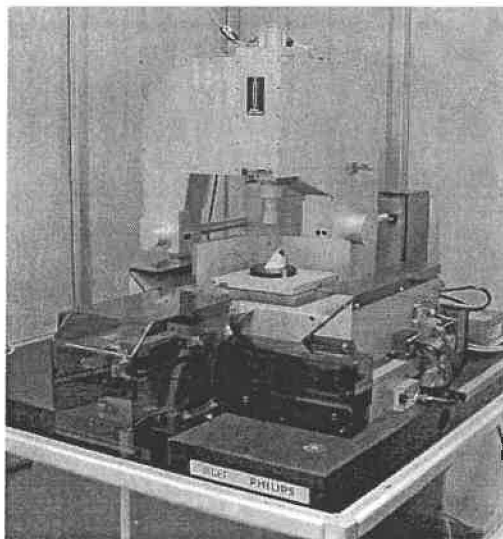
Photograph of the prototype of the ultra precision coordinate measuring machine placed in an enclosure.
